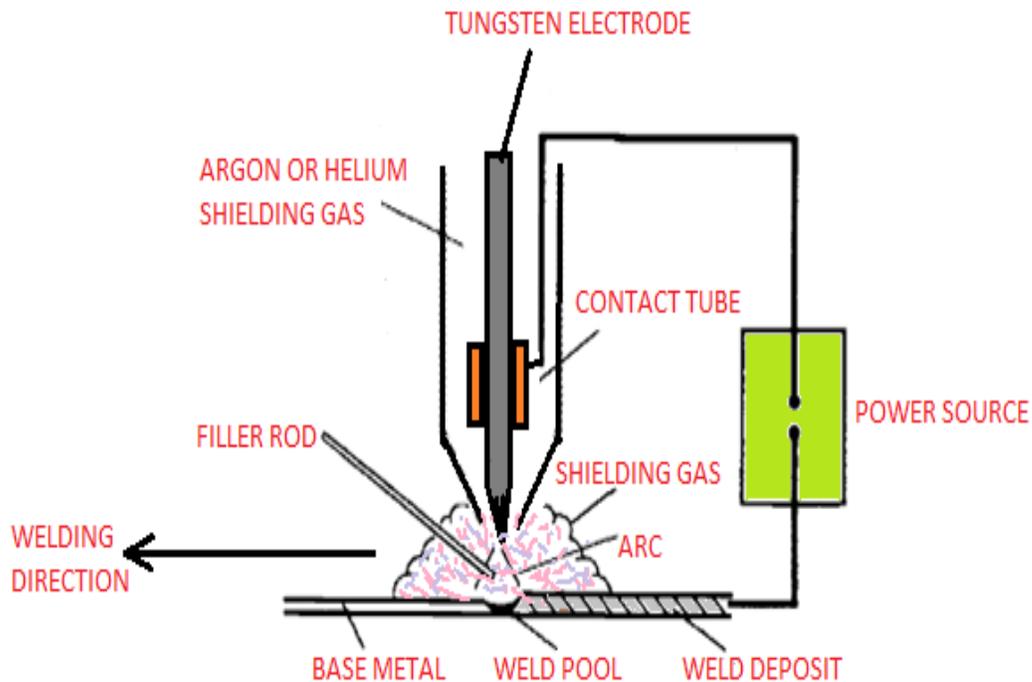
Schematic view of gas tungsten arc welding process (GTAW) incorporating a filler rod [51].
